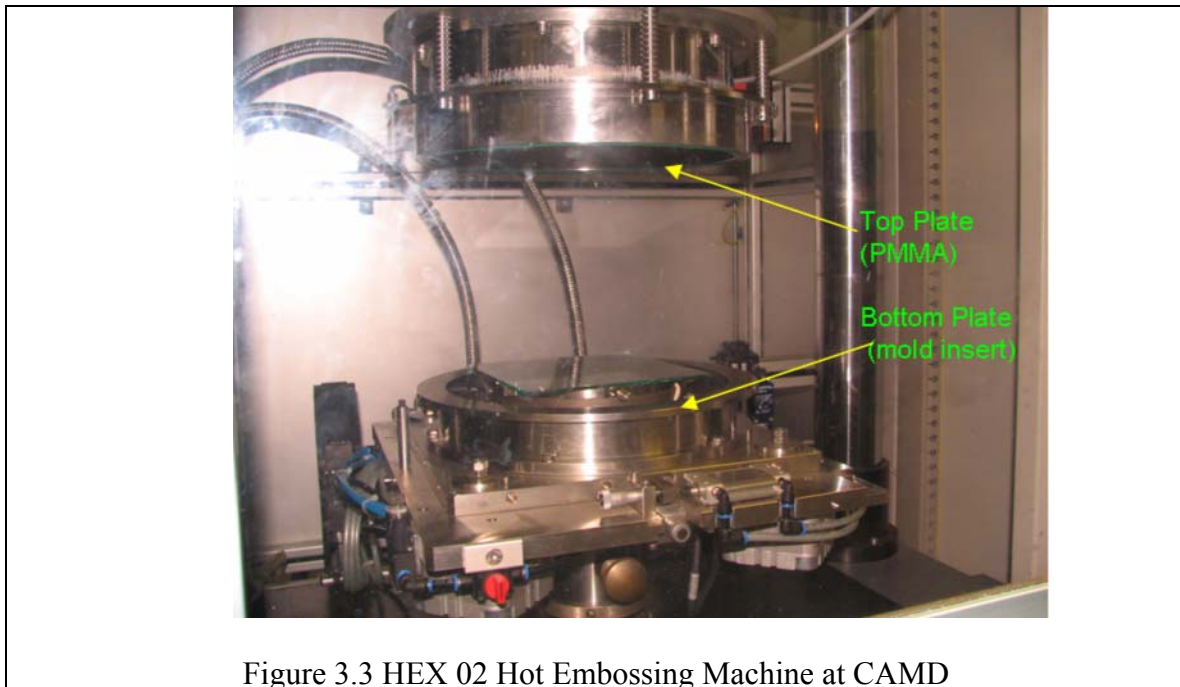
HEX 02 Hot Embossing Machine at CAMD
